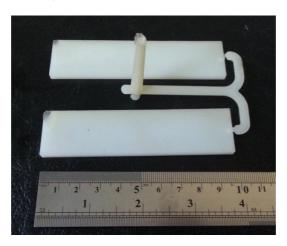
Welding specimens produced by plastic injection molding
